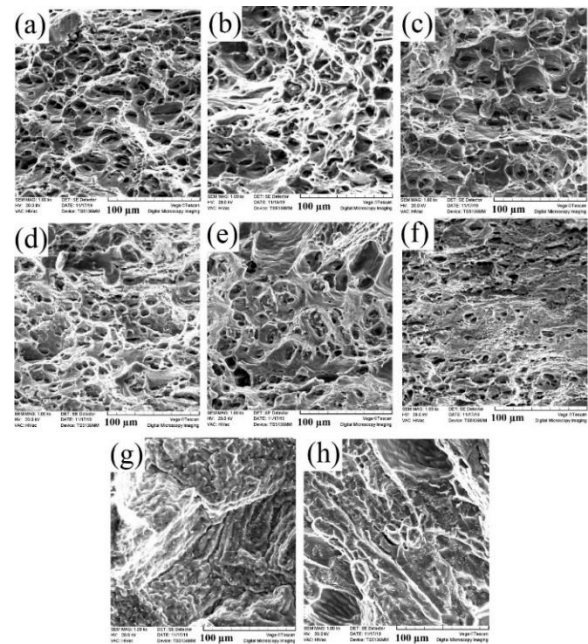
SEM micrographs of fracture surfaces for tensile tested (a) raw material (b) flux-free welded specimen (c) 2.5% SiO_2 active flux welded specimen, (d) 7.5% SiO_2 active flux welded specimen, (e) 10% SiO_2 active flux welded specimen, (f) 2.5% TiO_2 active flux welded specimen, (g) 7.5% TiO_2 active flux welded specimen, (h) 10% TiO_2 active flux welded specimens
